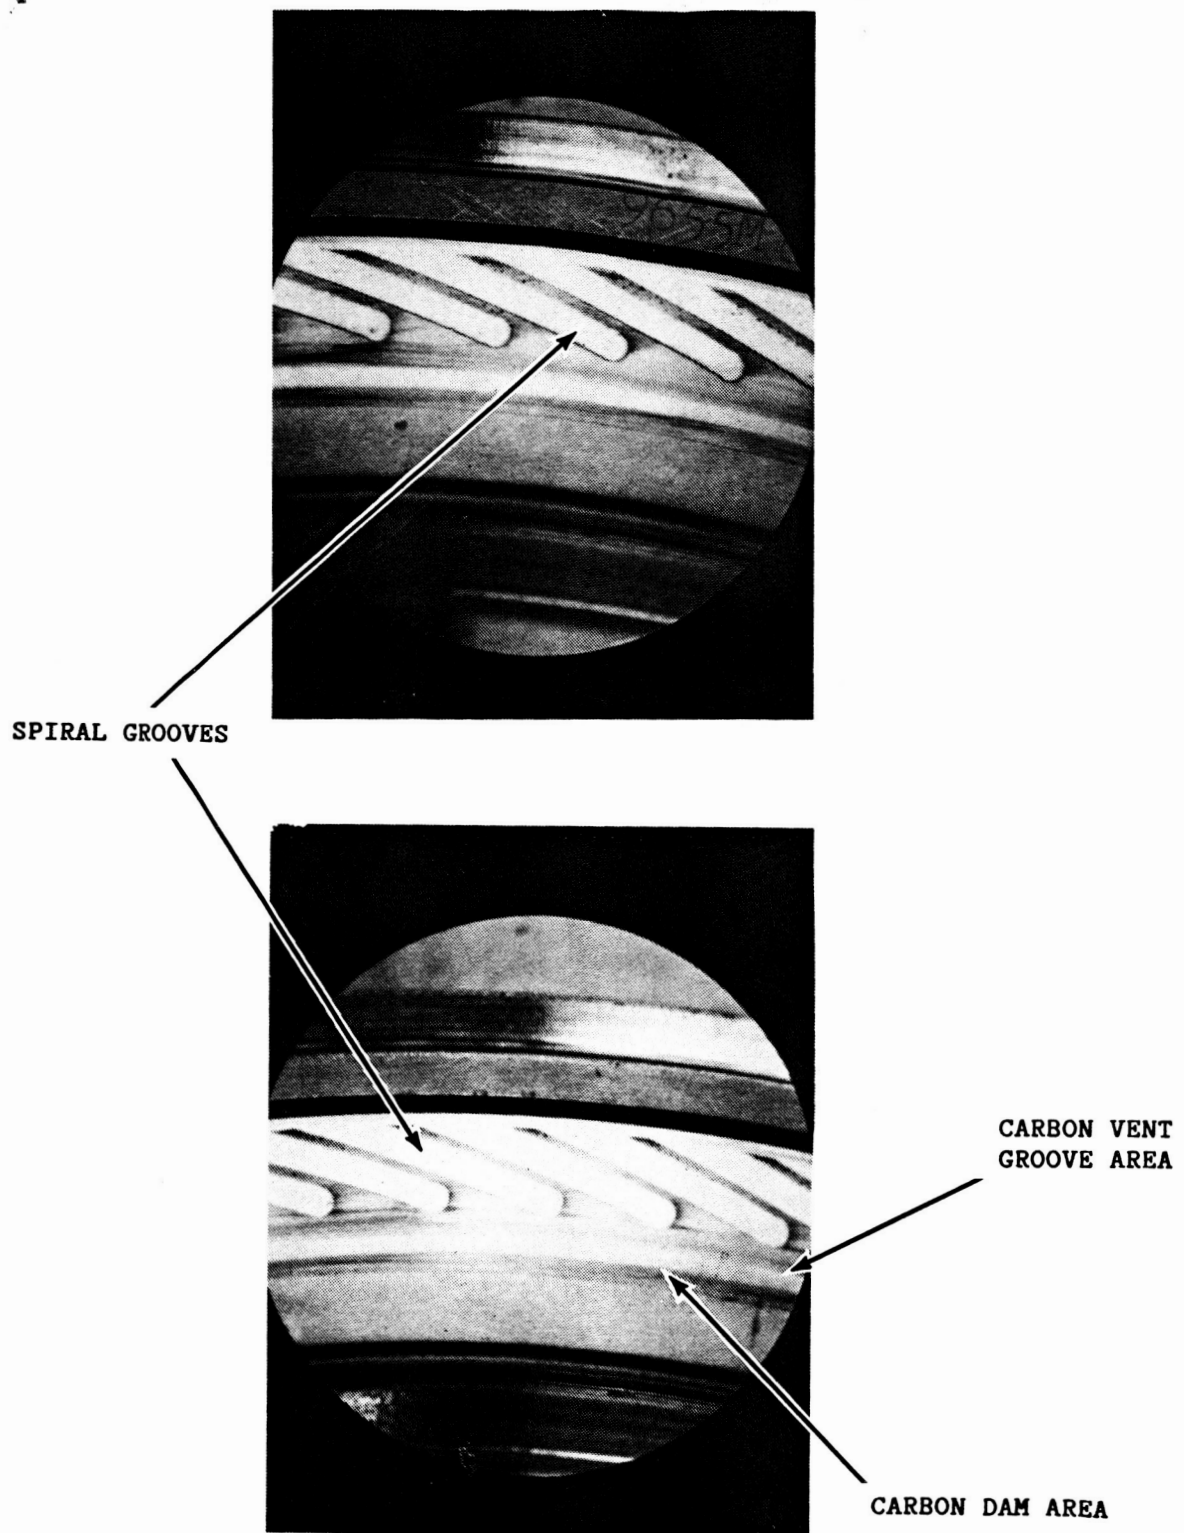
Spiral Groove Gas Bearings, After Build 23.
